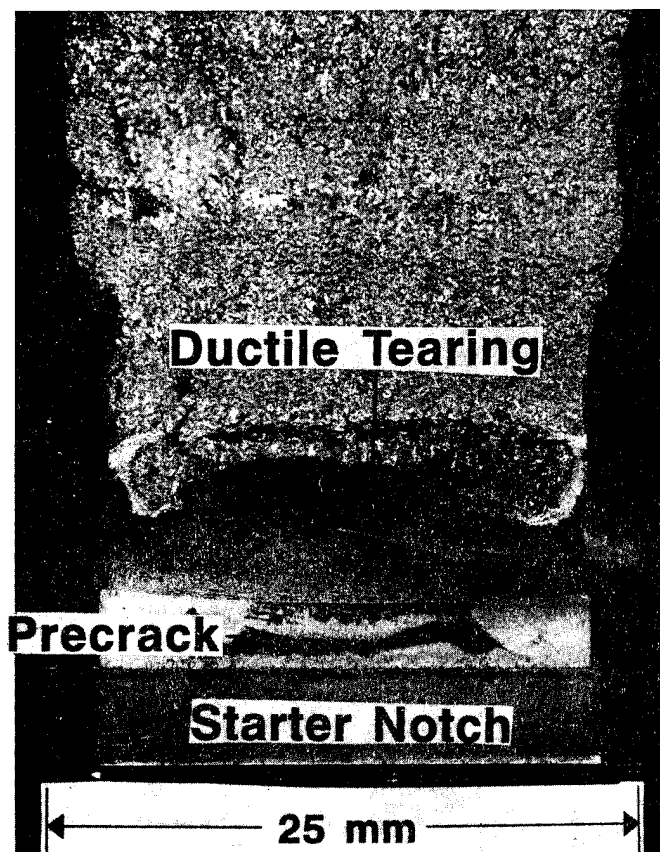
Fracture surface and precrack for undermatched specimen.
